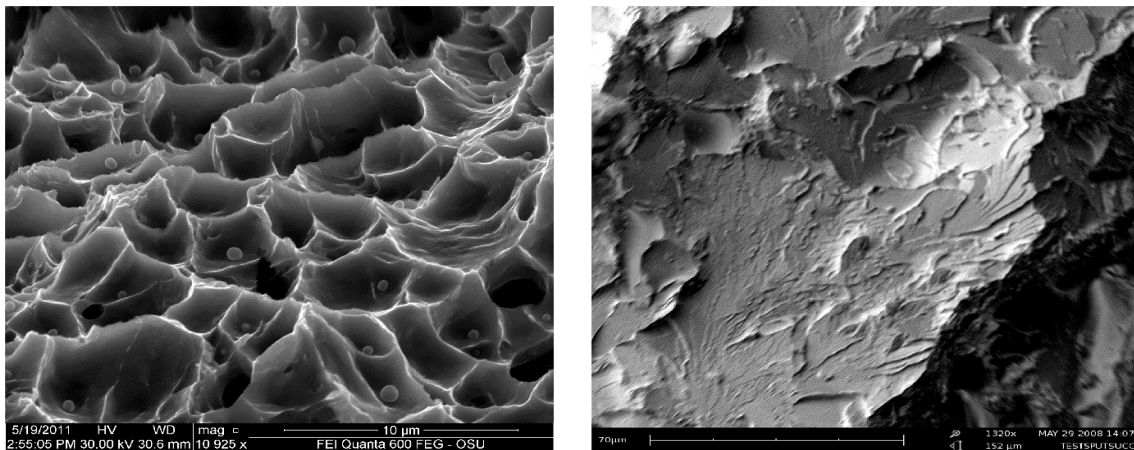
Left: Ductile fracture showing dimples. Right: Brittle, transgranular fracture.[45]
